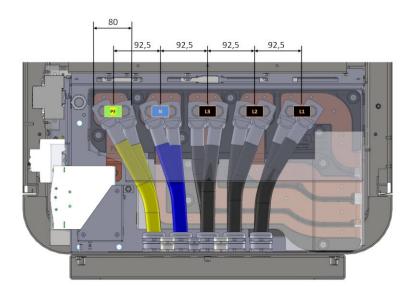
Screw connection of the mains cables to the conductor rails (in mm)
